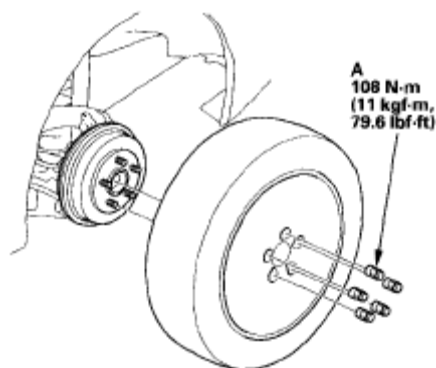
Identifying Wheel Nuts And Rear Wheel (With Torque Specifications)
